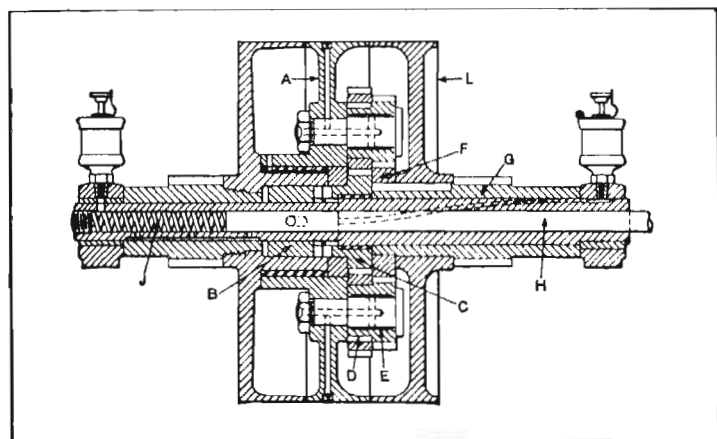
Compound or Reverted Train of Epicyclic Gearing for Reducing Speed
